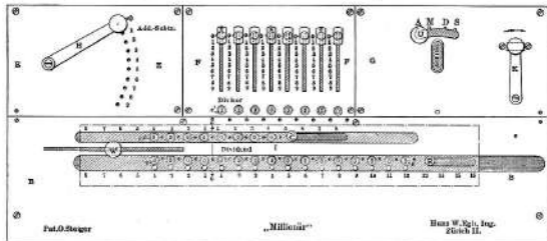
PLAN OF TOP OF MACHINE, SHOWING OPERATING HANDLES, INDICATING DIALS, ETC.
